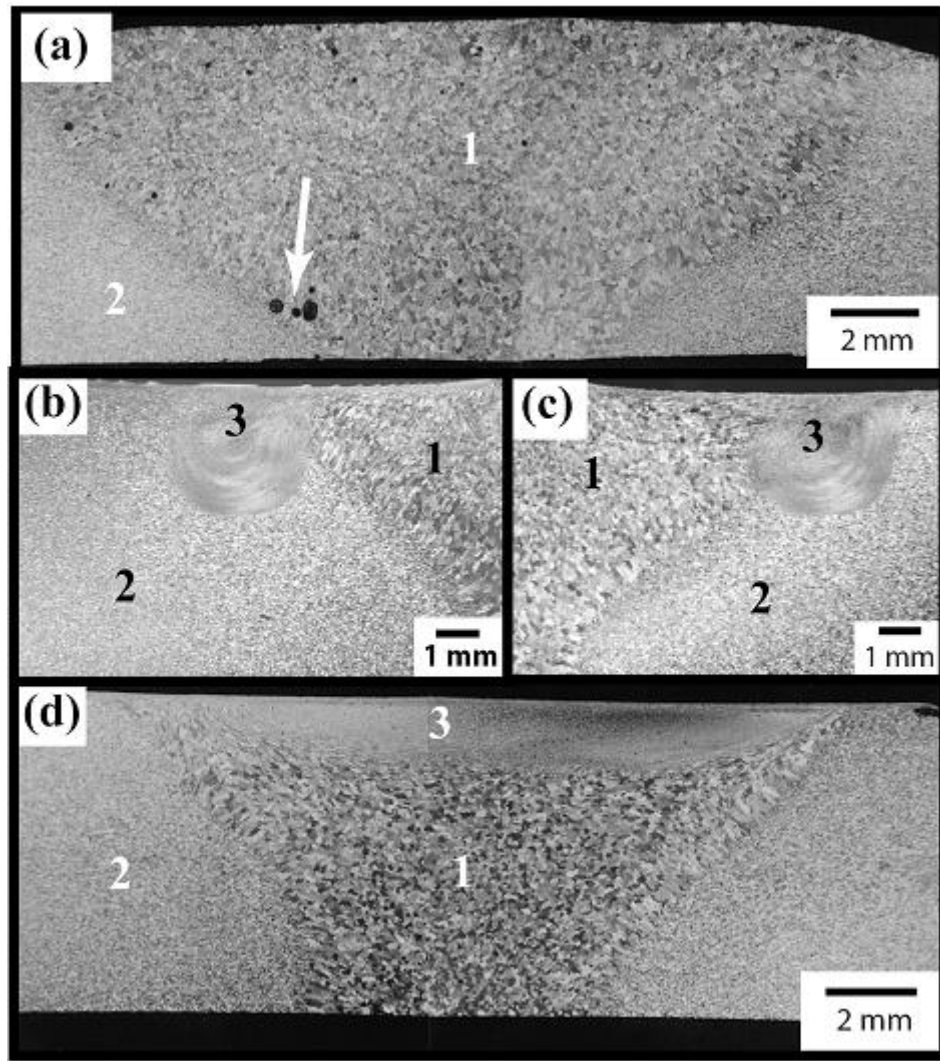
Light macrographs of 5083-H321 Al in the following conditions: a) as-fusion welded, (b) small shoulder tool with fusion weld on advancing side, (c) small shoulder tool with fusion weld on retreating side, and (d) large shoulder tool. Different microstructural regions within the micrographs are indicated by 1) fusion weld (5356 Al), 2) parent material (5083 Al), and 3) fine-grain FSP. The arrow in (a) indicates porosity within the fusion weld. The right-hand side is the advancing side of the FSP tool, and the direction of tool travel is into the page.
